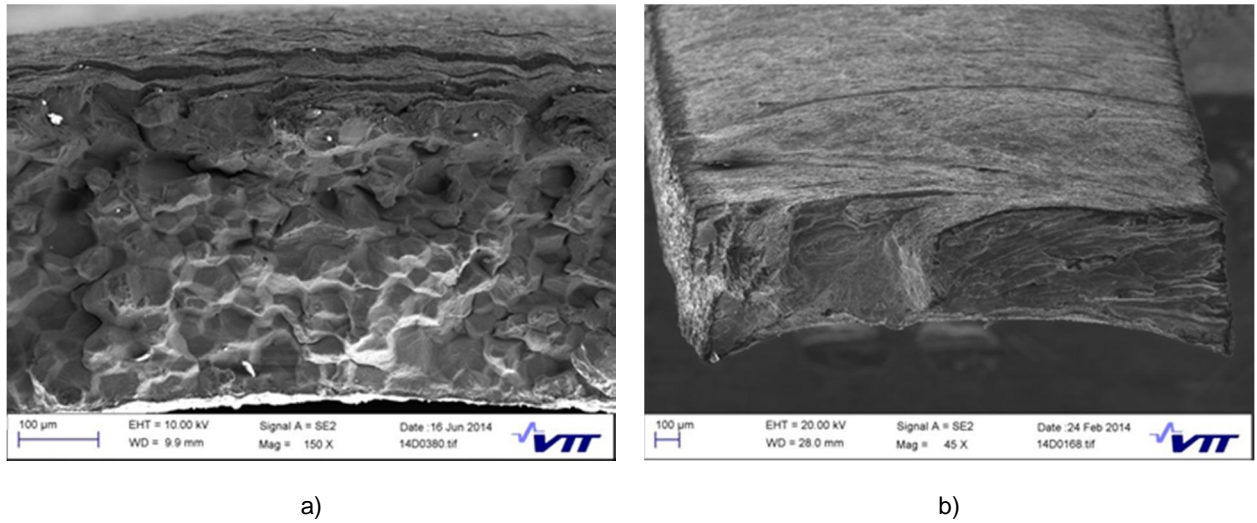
Fracture surfaces of specimens cut from the ~8*0.5 mm 316L tube after the SSRT test in SCW at 550°C. As-received specimen a) has almost fully intergranular failure, and welded specimen (fracture in the middle of the weld) b) has mostly intergranular/interdendritic failure.
